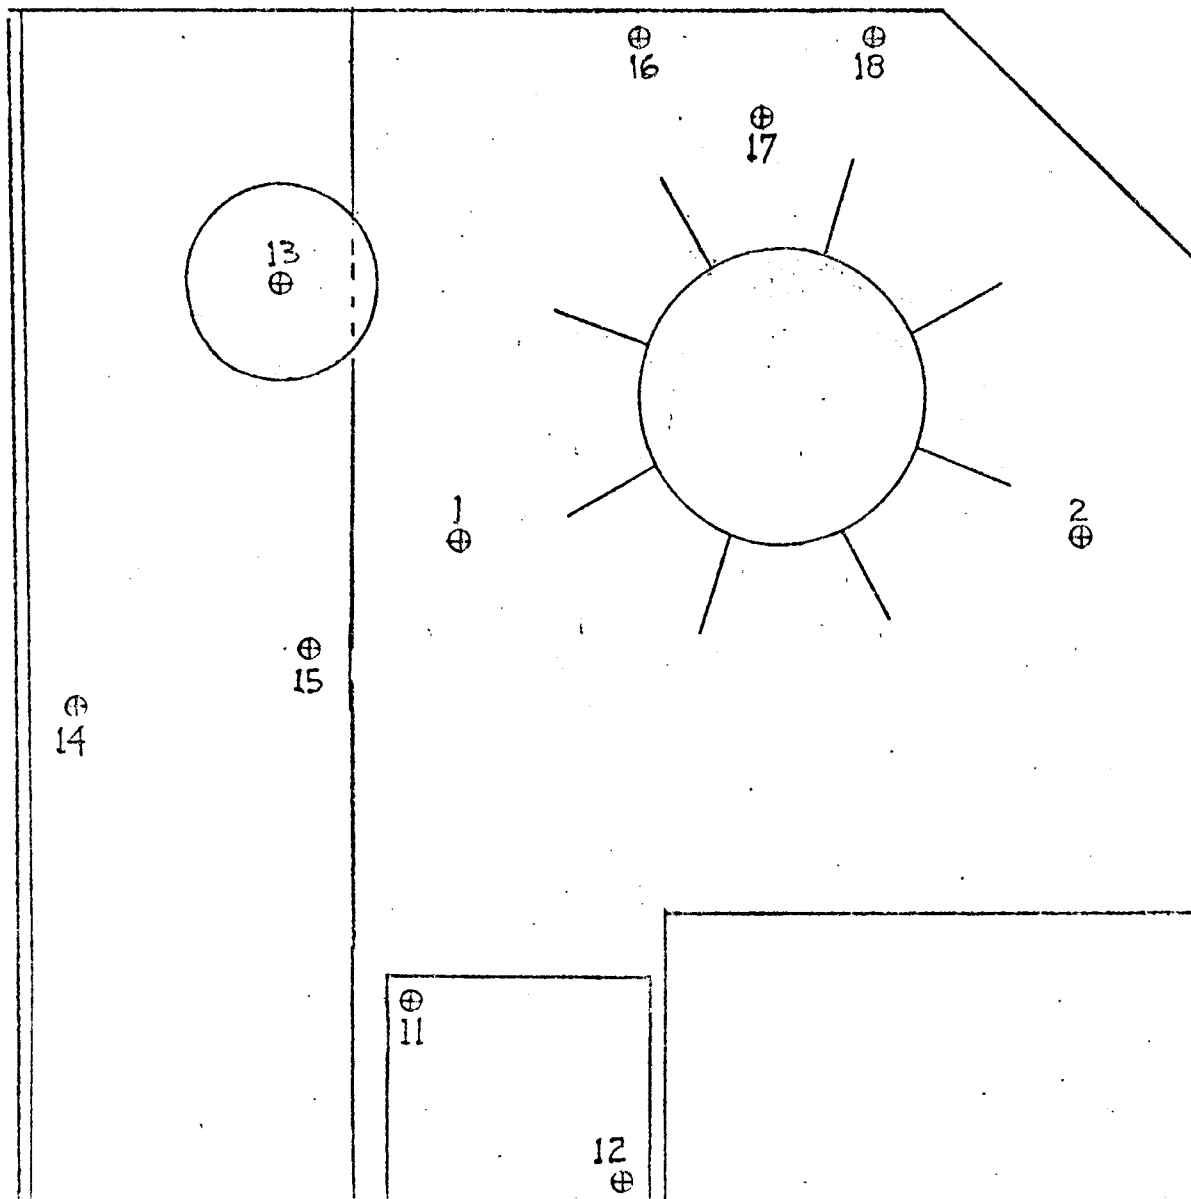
Subpackage No. 2 Boyd Bolt Location Identification
